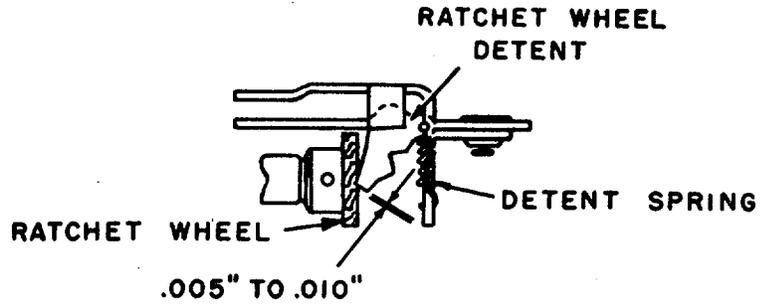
Drive shaft ratchet wheel alignment adjustment (TT-76/GGC and TT-76A/GGC below serial number 302 and Order No. 49651-Phila-56).
